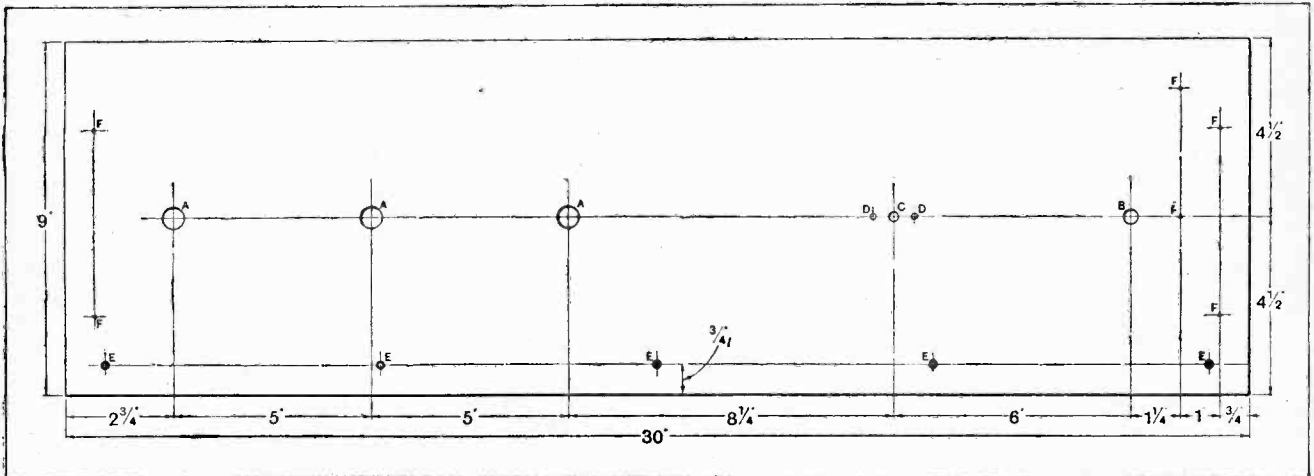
Drilling details of the two terminal battens. The sizes of the holes are as follow: A, 7/16in. diam.; B, 5/16in. diam.; C, 1/8in. diam., countersunk for No. 4 wood screws.
